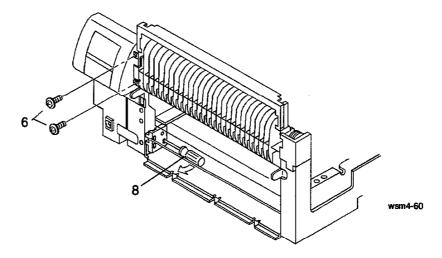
Removing the Tray 1 Paper Size Sensor
